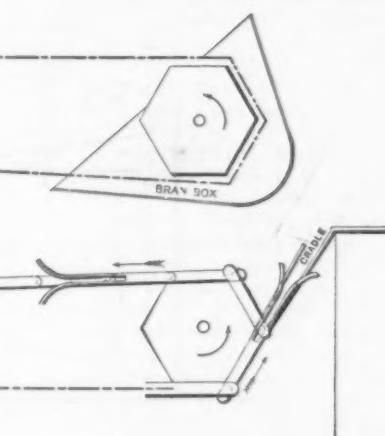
THE THOMAS CLEANING AND POLISHING MACHINE.
